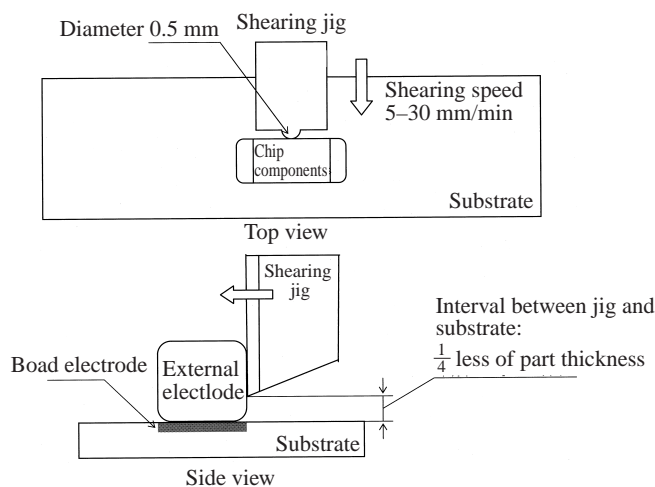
Schematic diagram of methods for shear strength of solder joints chip components
